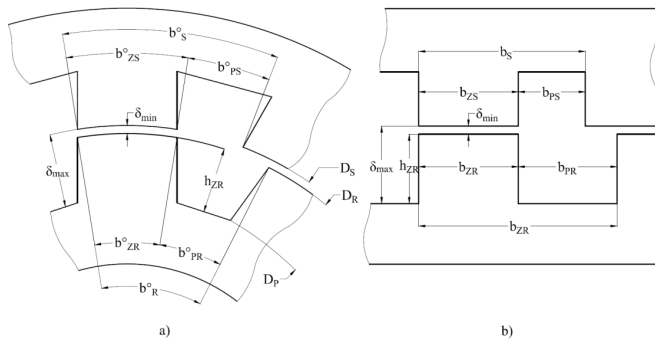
Tooth zone with a rectangular tooth fragment (a) and a developed view (b).
